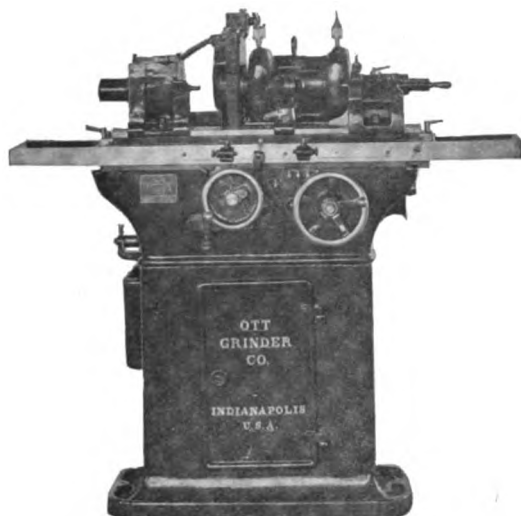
5" x 18" (127 x 457 mm.) Plain Grinding Machine
